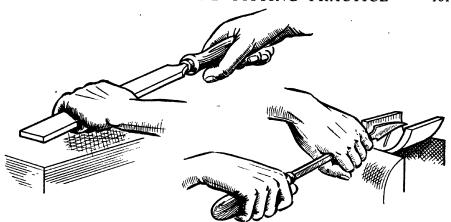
METHOD OF USING THE STRAIGHT SCRAPER
